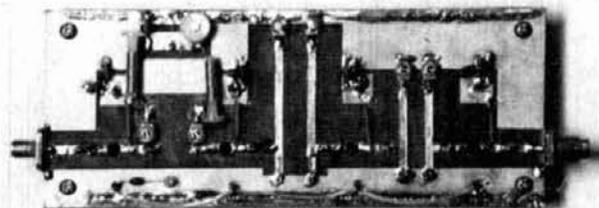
Photograph of the prototype multiplier, which was built on hand-cut board.
